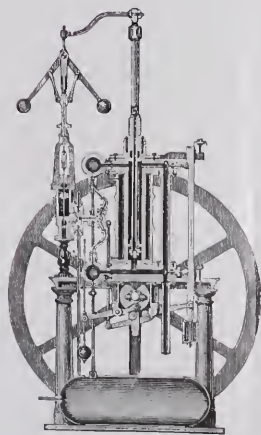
Wright's Gas-Explosion Engine, 1833.
